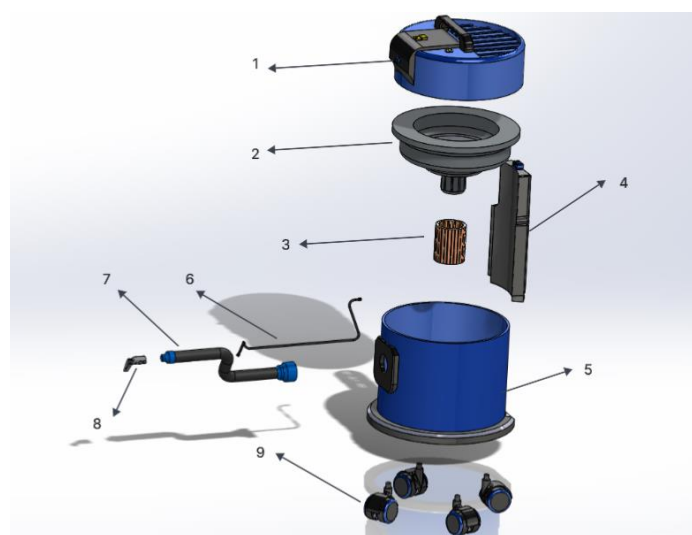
Exploded View of Multi-Sprayer Ash Vacuum
